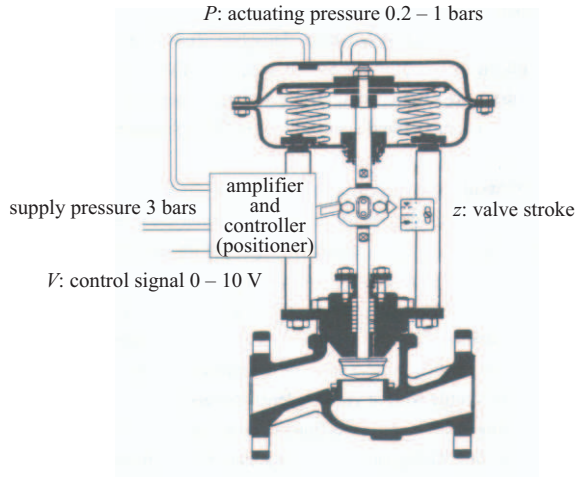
Cross-sectional view of a pneumatic valve with an electro-pneumatic position controller
